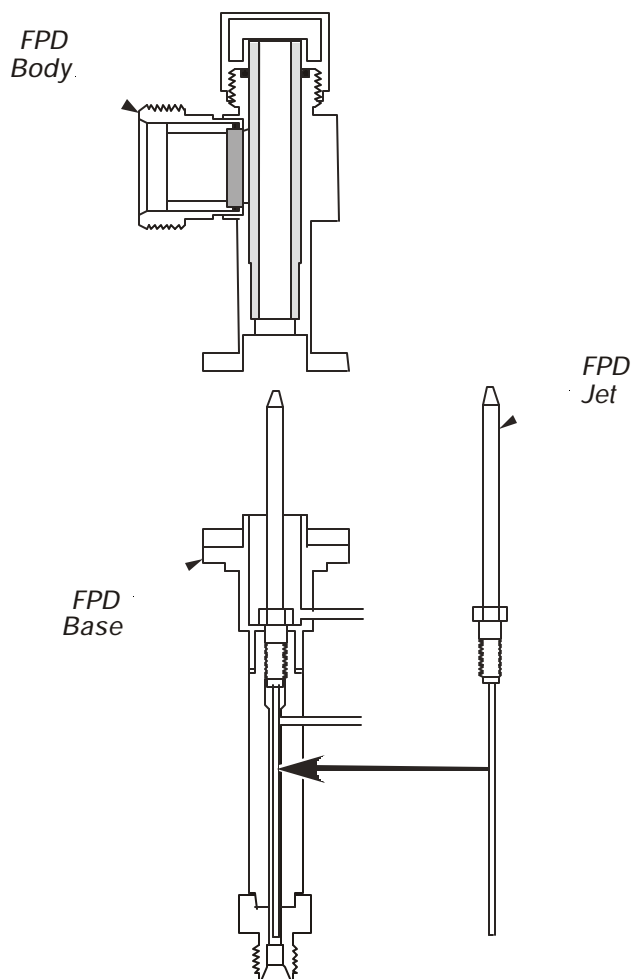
Cutaway view of a FPD showing the jet assembly
